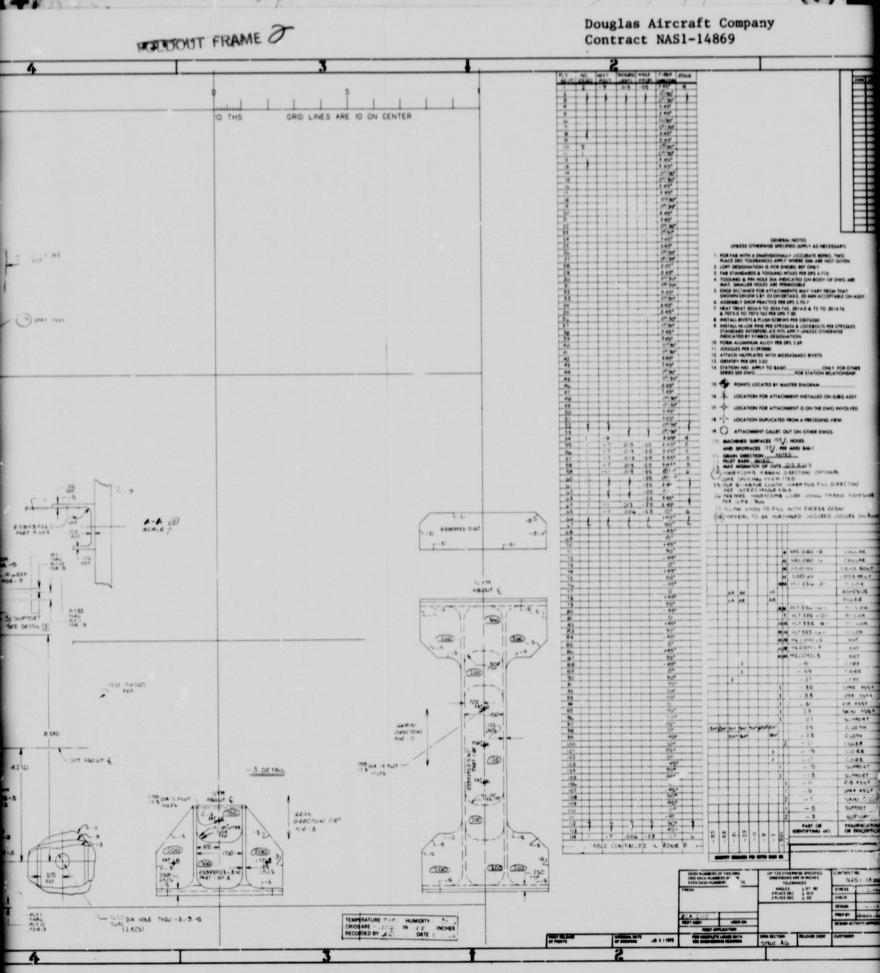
DRAWING Z5943445 - SPECIMEN ASSY - COVER PANEL, COMBINED SHEAR AND COMPRESSION (SHEET 3 CONCLUDED)
